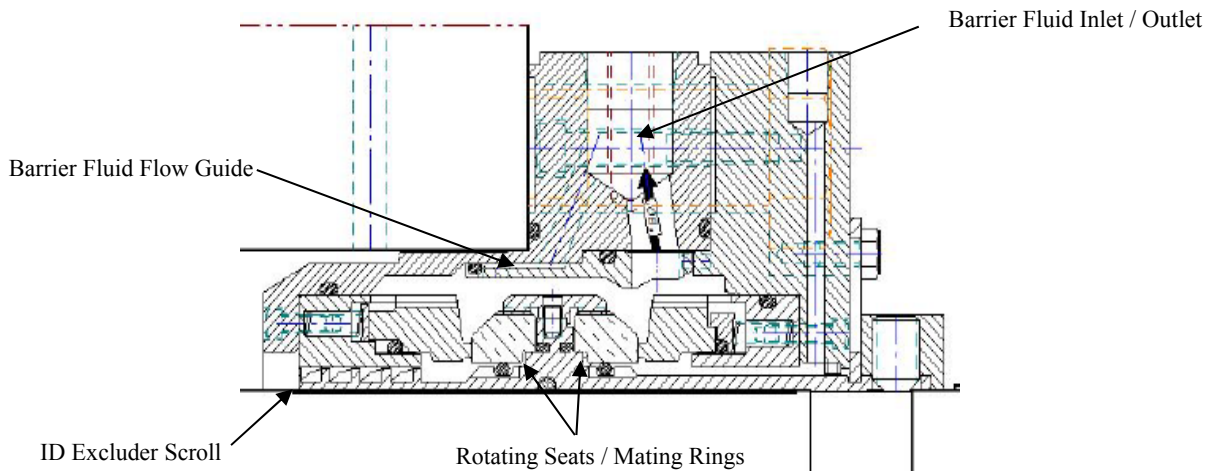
3CW-FF Type A with API Piping Plan 54 or 53B
